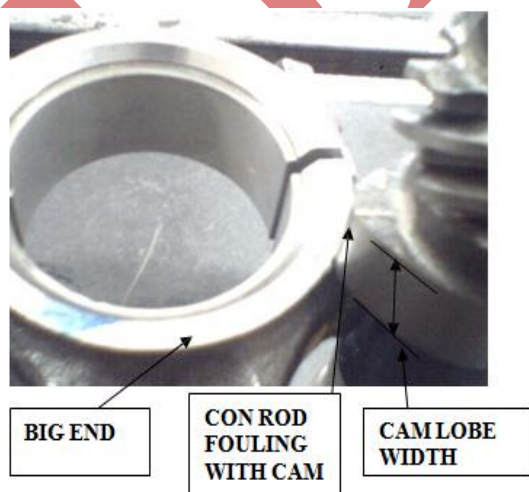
FOULING OF CONNECTING ROD ON CAMSHAFT
